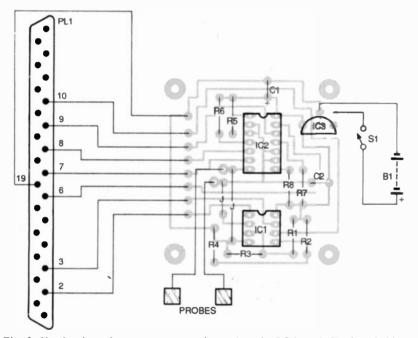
Here's where the components are located on the PC board. Single-sided board design makes assembly easy—there is no worry about placed-through holes or solder connections on the top side of the board.
